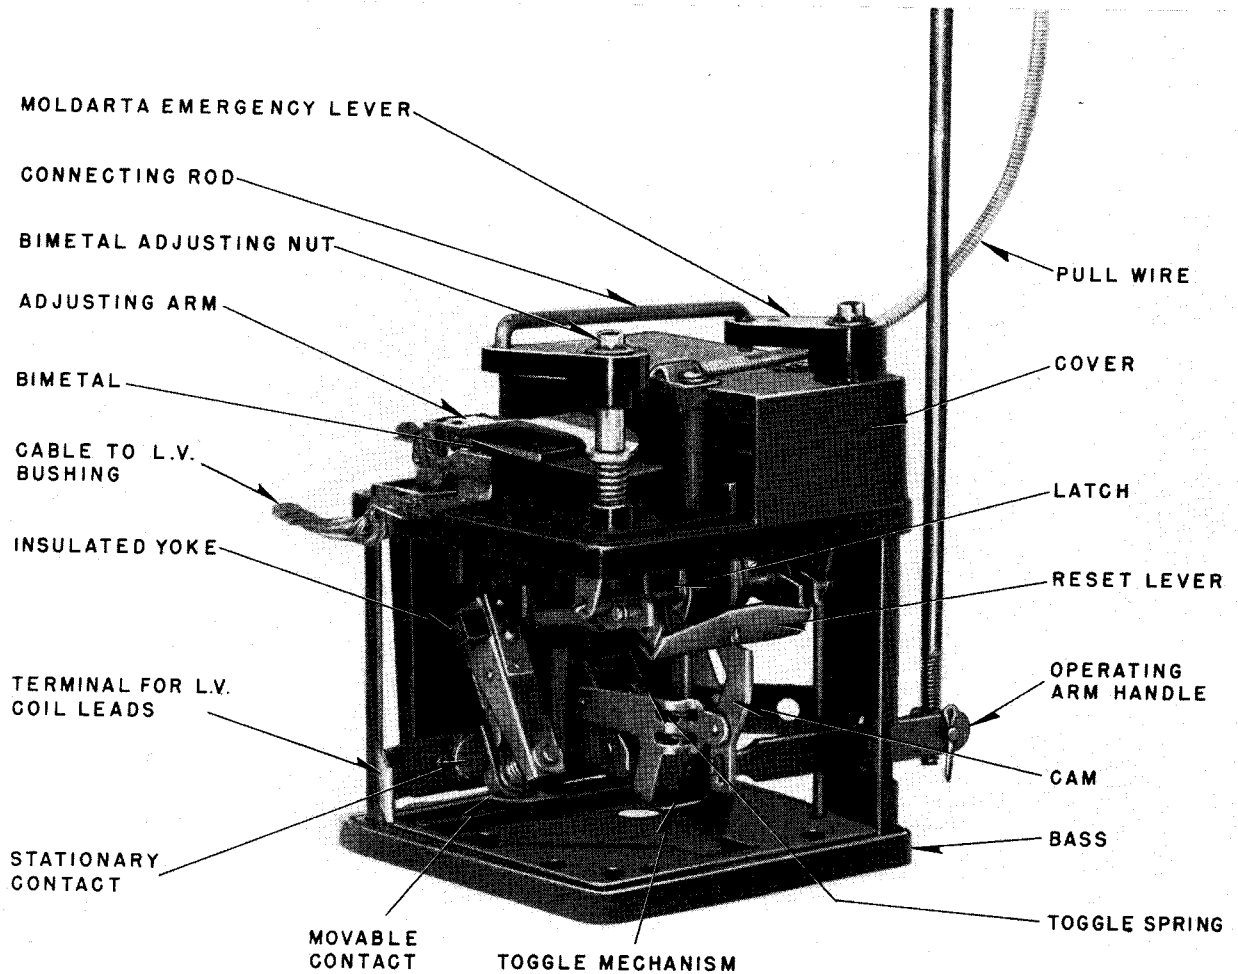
Cutaway View of Type "TR" Circuit Breaker.
